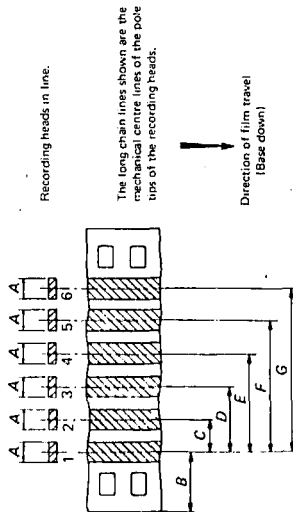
FIGURE — Location and dimensions of the magnetic sound recording head gaps
